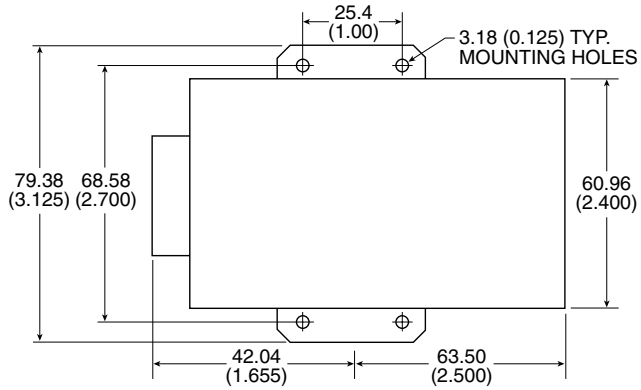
A. - FLSC-45 Mounting Dimensions, mm (inches)
